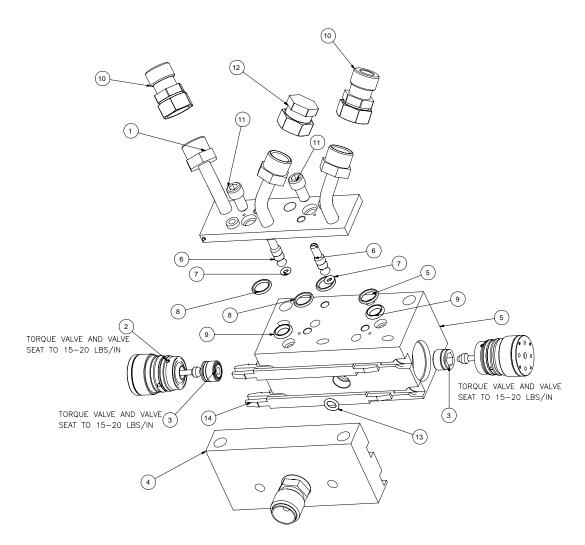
78075-01 & 78075-03 Bell Wash Assemblies
